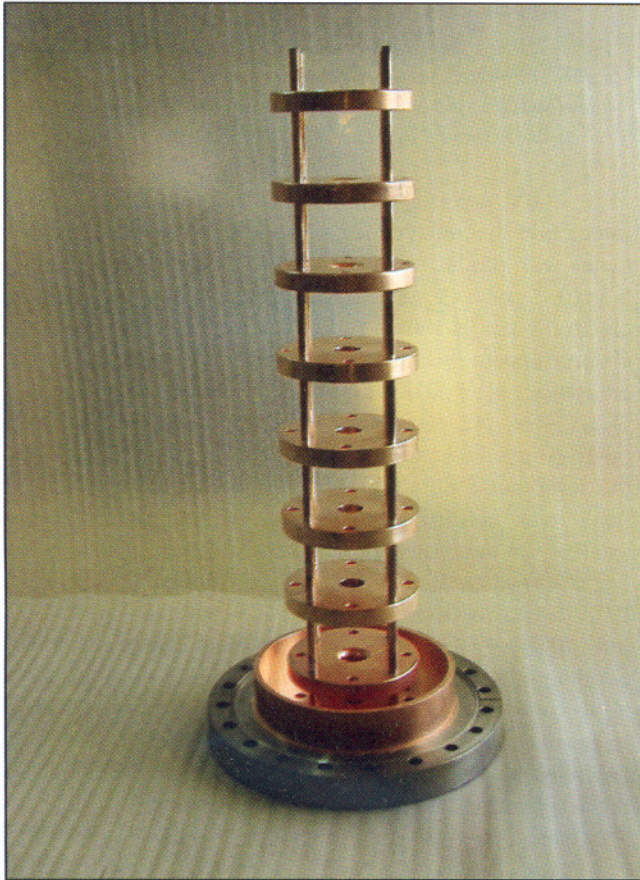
8-Cell PWT Linac Assembly.
